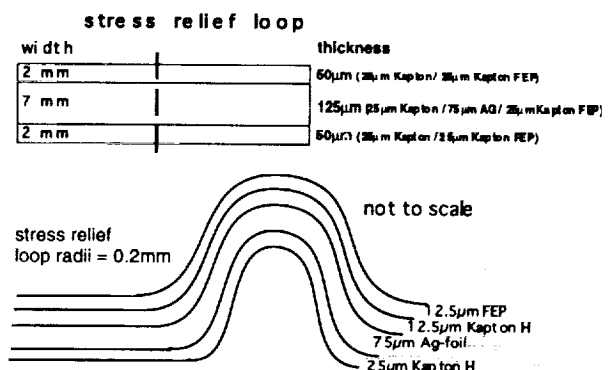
Wiring Collecting Panel (WCP) arrangement - Figure 14: Design details of WCP
